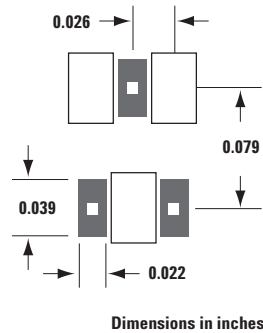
Recommended PCB Pad Layout for Avago's SC70 3L/SOT-323 Products.
